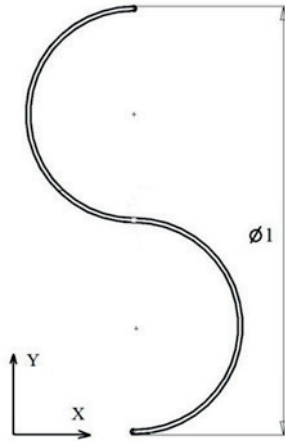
Top view of the S-shaped Savonius rotor. Dimensions are in meters.
